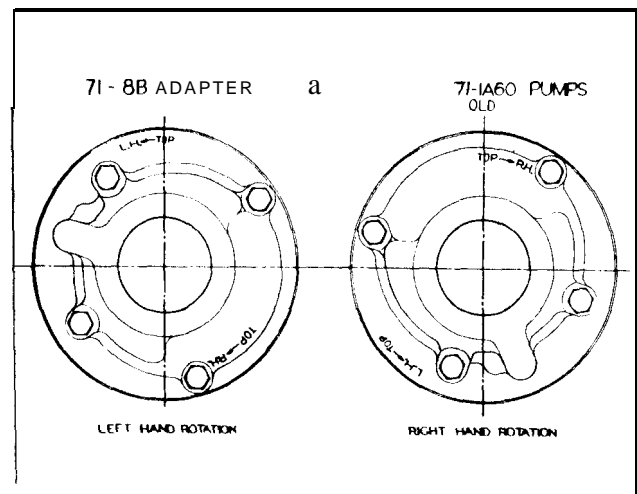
Orientation Markings for Old 71-1A60 Pump Assembly on 71-8B Adapter
